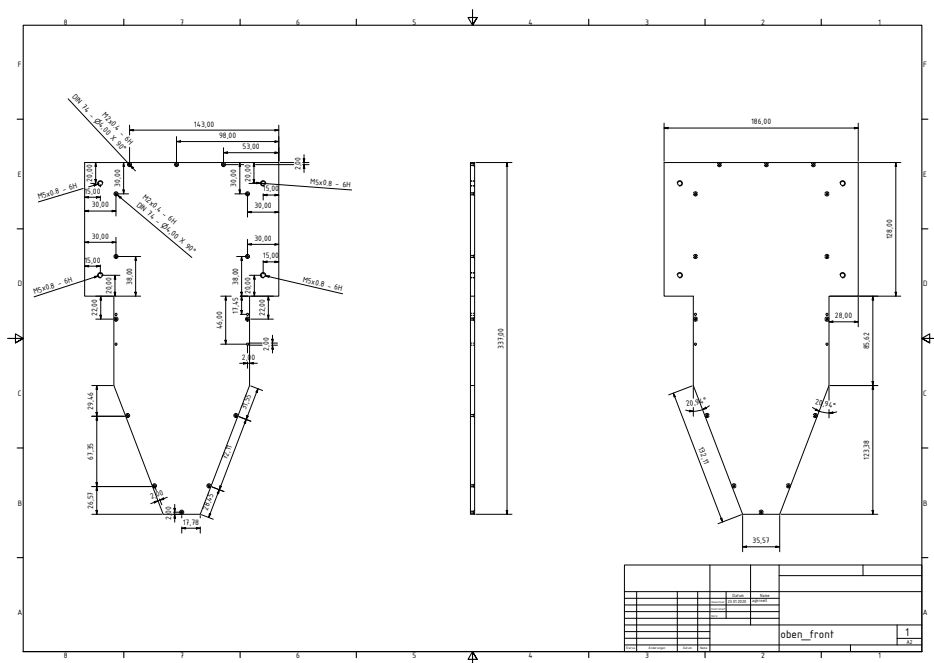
Technical drawing of the top plate of a box from the front part of the pair spectrometer.
